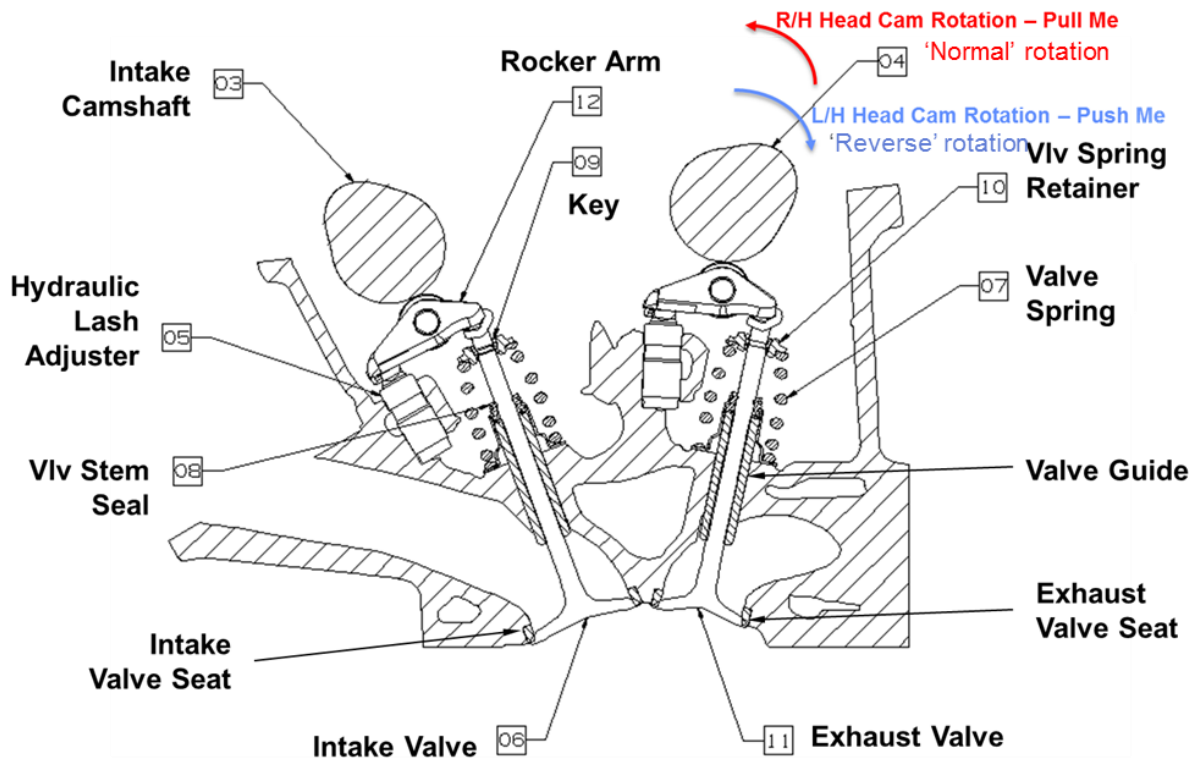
Front view of Left bank cylinder head and valve train cross-section
